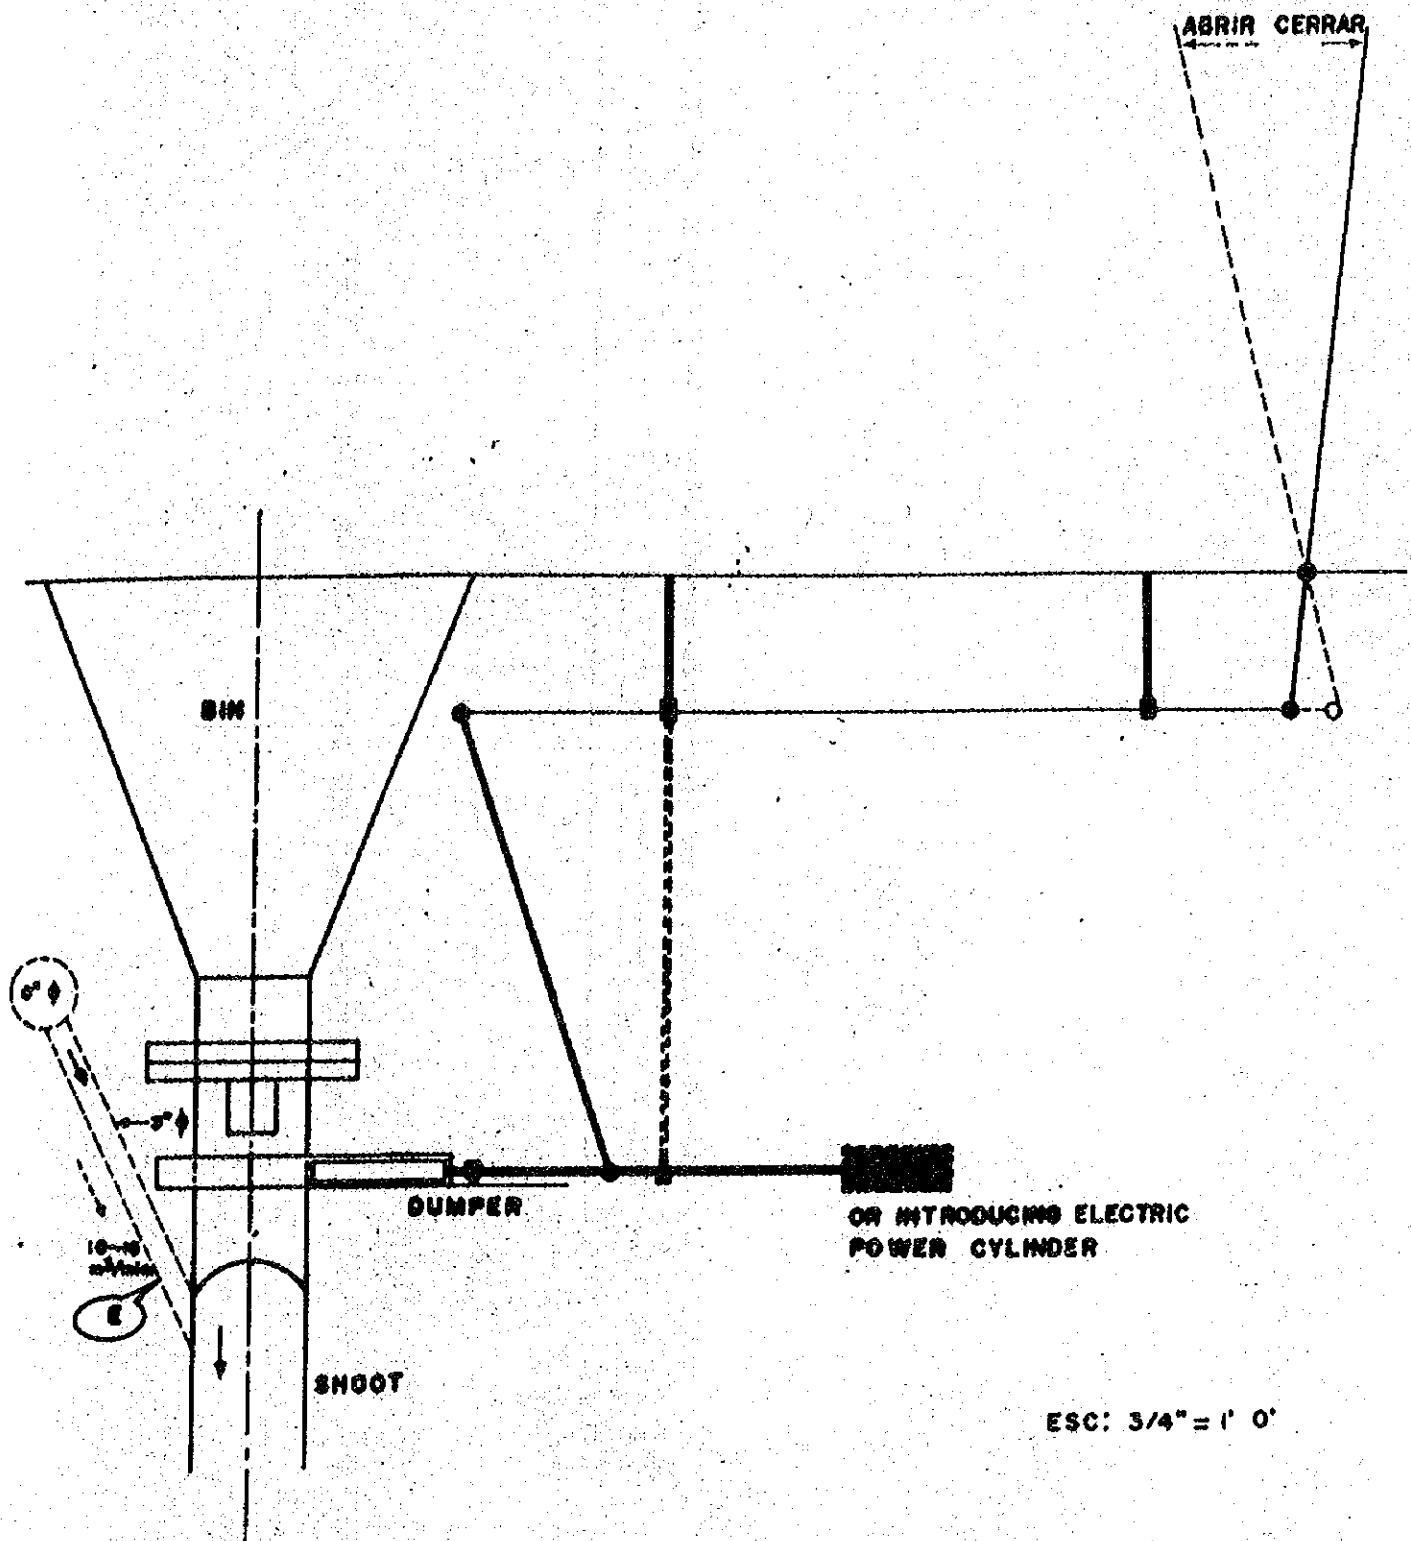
FIGURE OF DUMPER HANDLE MODIFICATION
